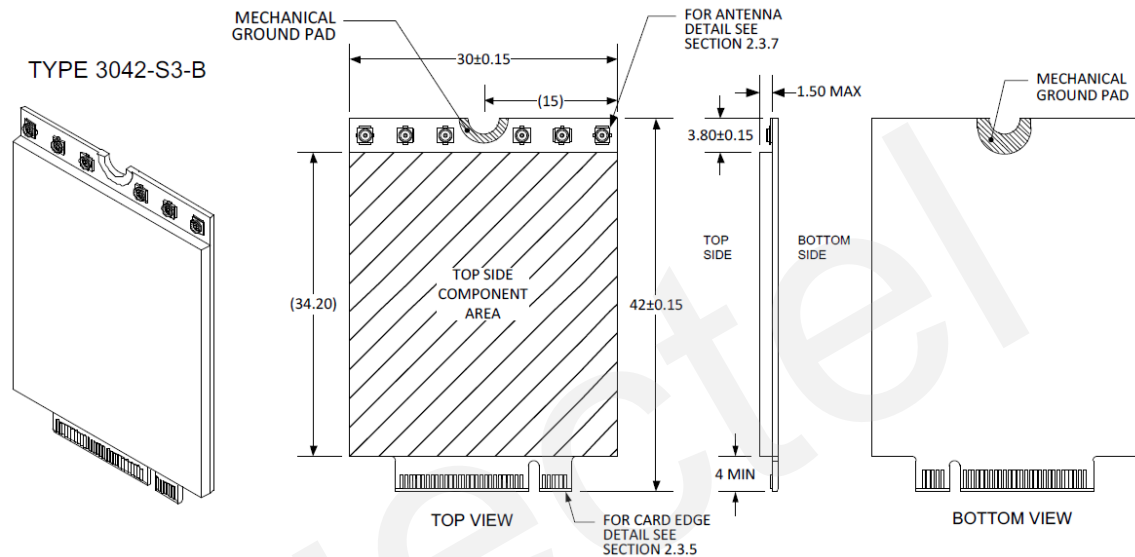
Standard Dimensions of M.2 Type 3042-S3 (Unit: mm)
